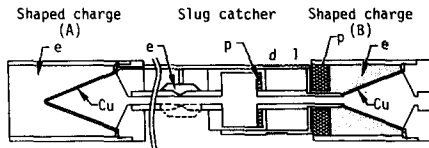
Schematic of multistage, shaped-charge drilling device (e = explosive; Cu = copper cone; p = porous metal shock attenuator; d = mild-detonation-fuse delay coil; l = cylindrical explosive lens).
